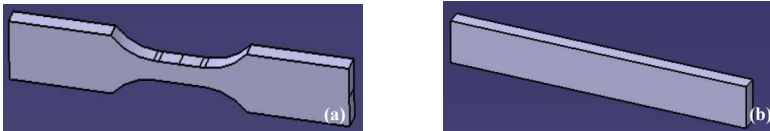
3D CAD Model of (a) tensile and (b) flexural work piece
